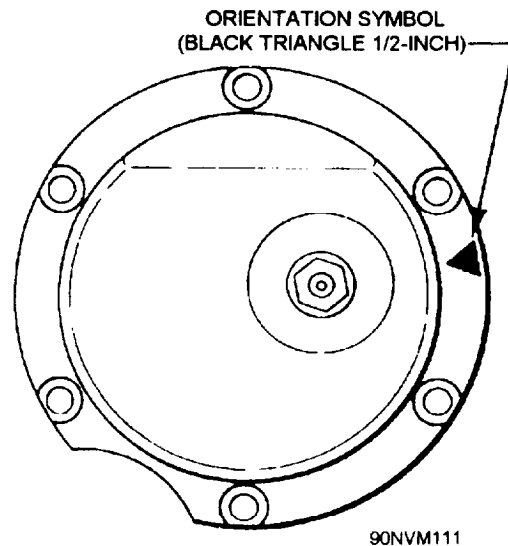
Mk 3 Mod 0 depth compensator.
